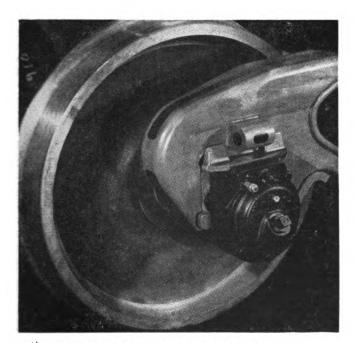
Vulcan type frame with adapter between jaw opening and same type cartridge journal box as shown in Fig. 1
